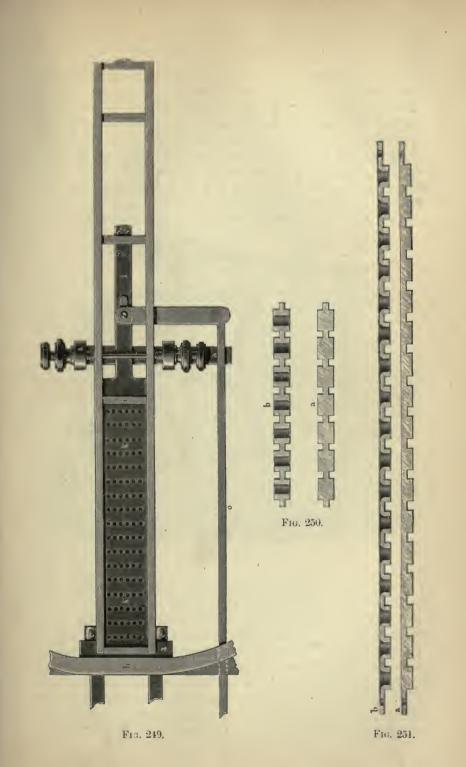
Fig. 246 shows the bottom of the old machine, and Fig. 249b as improved by Josten. Below the bottom the charging slide (1) (Figs. 249 and 250b) is moved by means of the bar (0), its rubbing surfaces being reduced to a minimum. The bottom also is so constructed that the friction shall be very small. Below the charging slide is the tube-plate (m). The projections (p and q) fix the two chief positions of 1. If q is on r, there is no communication with m, but if p is on r, the composition falls through the perforations into the caps.
